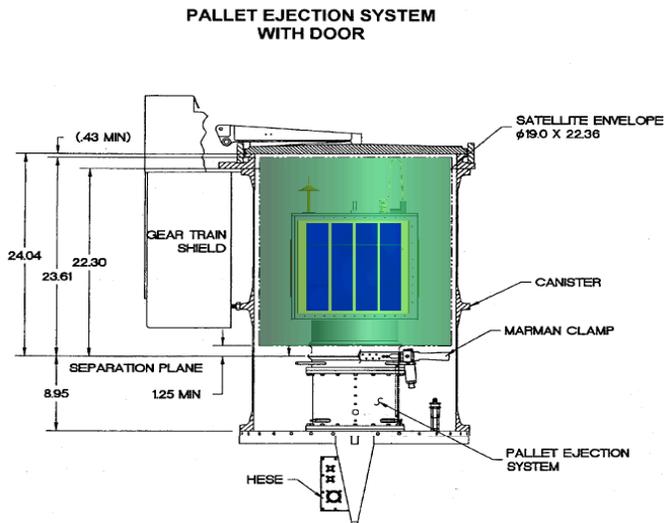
Interface drawings of FS-2 to the PES container. Dimensions are in inches.
